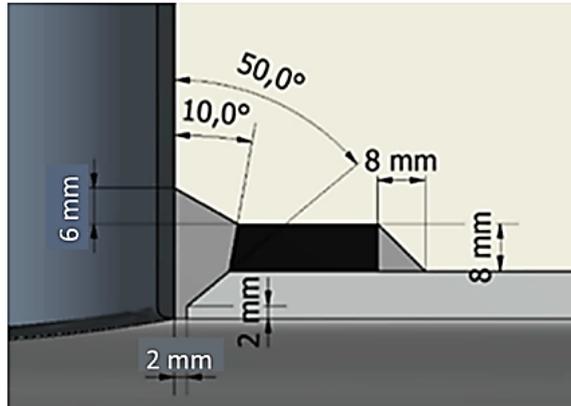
Detail Welding Configuration Between Shell and Nozzle
